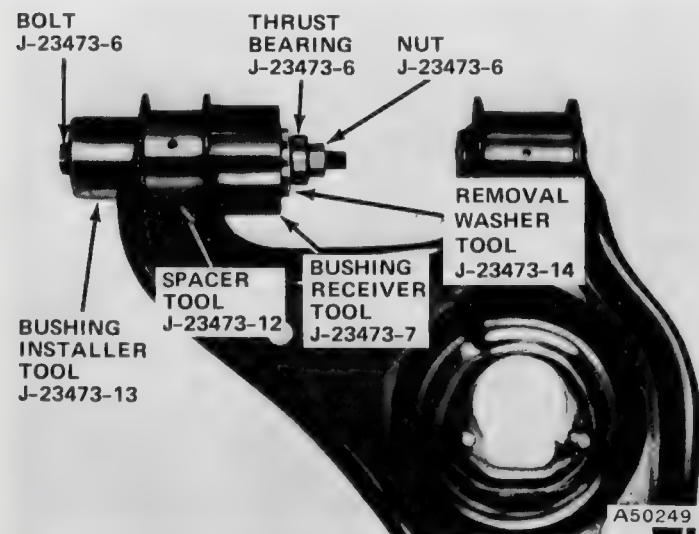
M-45 Lower Control Arm Rear Bushing Installation
